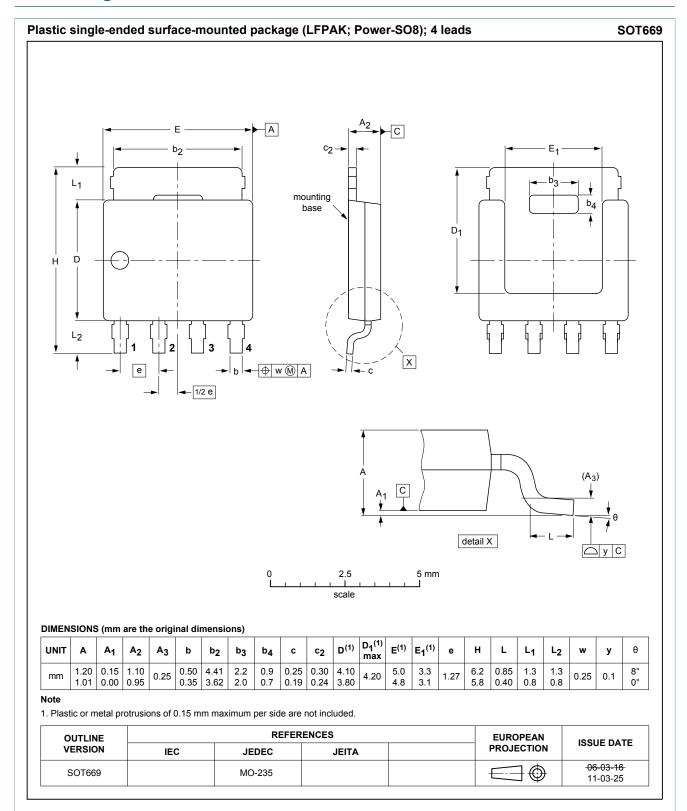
Package outline LFPAK; Power-SO8 (SOT669)
